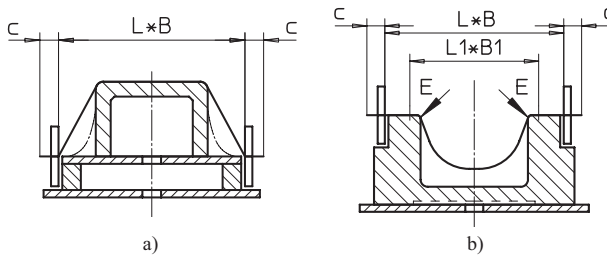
Forming surface, intake surface, clamped edge (c), schematic
